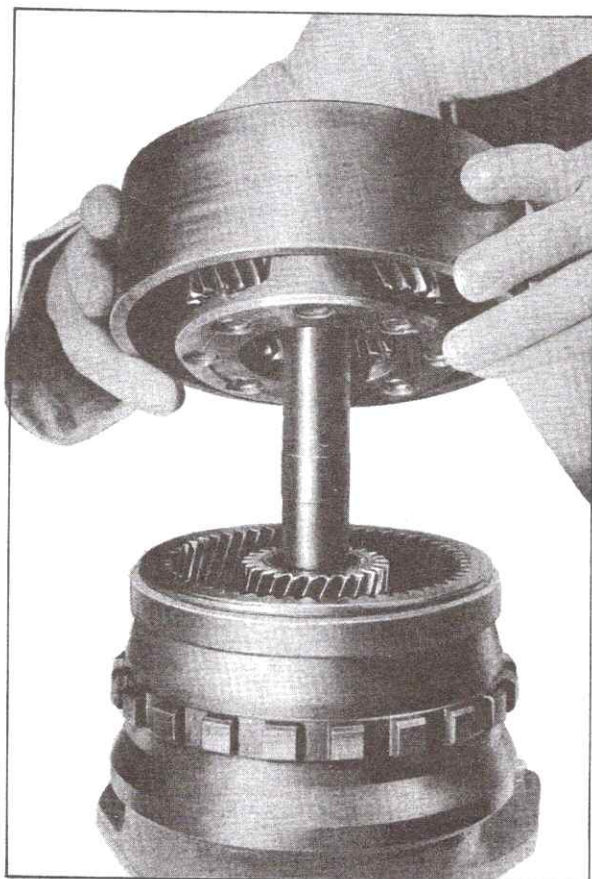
Installing Reaction Carrier on Output Carrier
